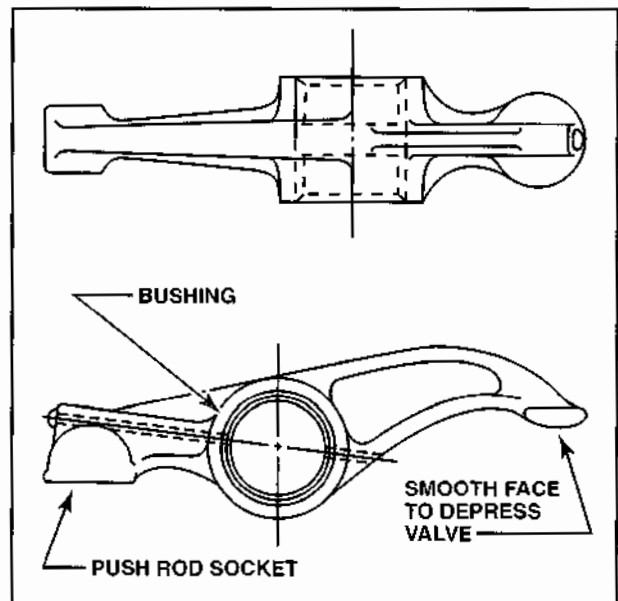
One end of this rocker arm is cup-shaped to hold a push rod, while the other end is machined smooth to push against the tip of a valve stem. When rotated by the push rod, the rocker arm pivots on its center bushing to depress a valve.
